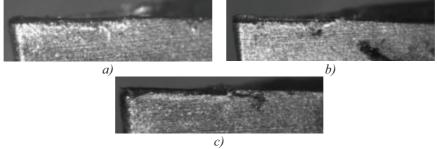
Cutting inserts after cast machining from master alloy: a) sample 1, b) sample 2, c) sample 3
